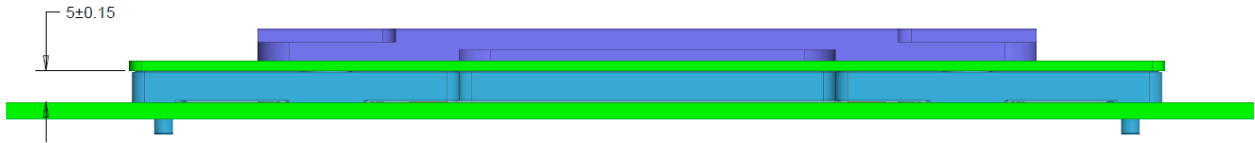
Tolerance Stack-up of Bottom Stiffener
